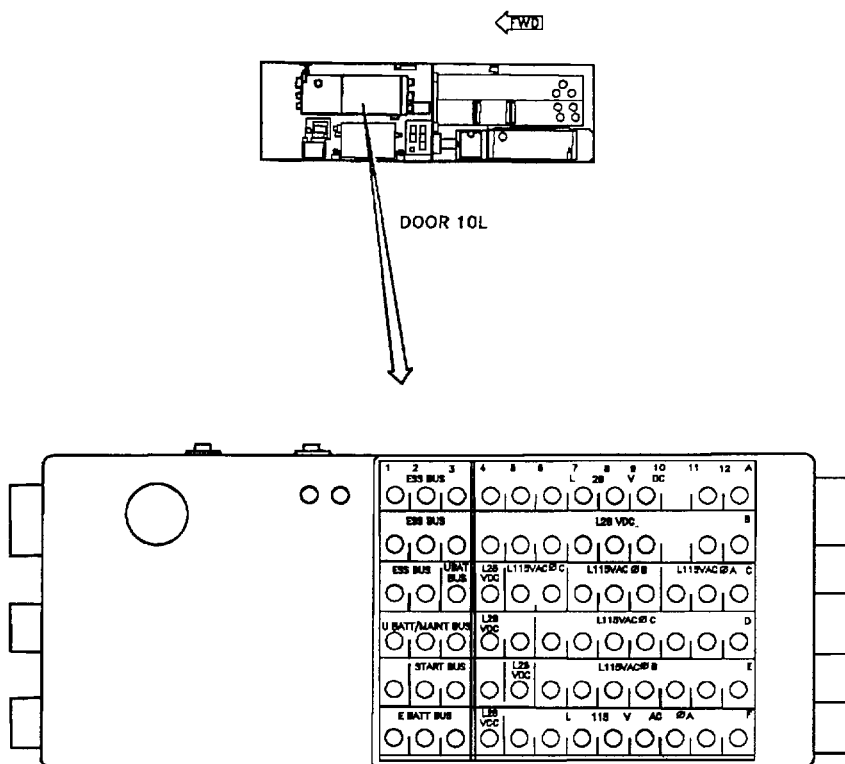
No. 7 Circuit Breaker/Relay Panel Assembly (52A-C057) (Sheet 2)
